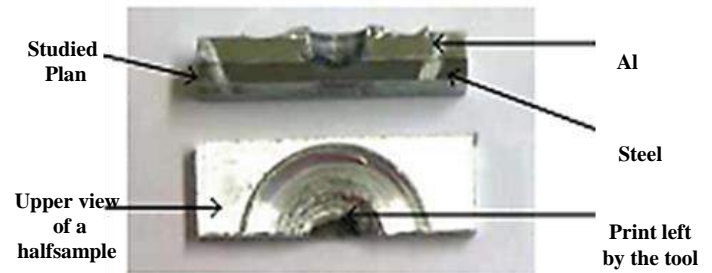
Photography of a cut sample, which shows the studied plan of the welds [11].
